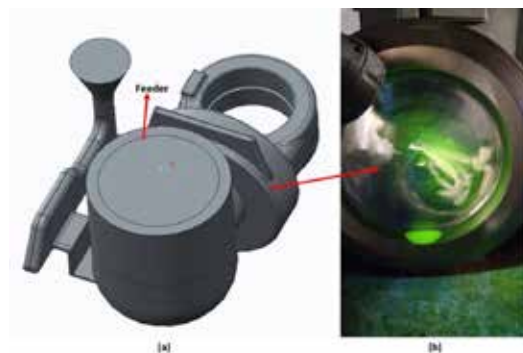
(a); Image of the mold design of the cast part, (b); Image of the flange of the casting part under UV light after machining.
